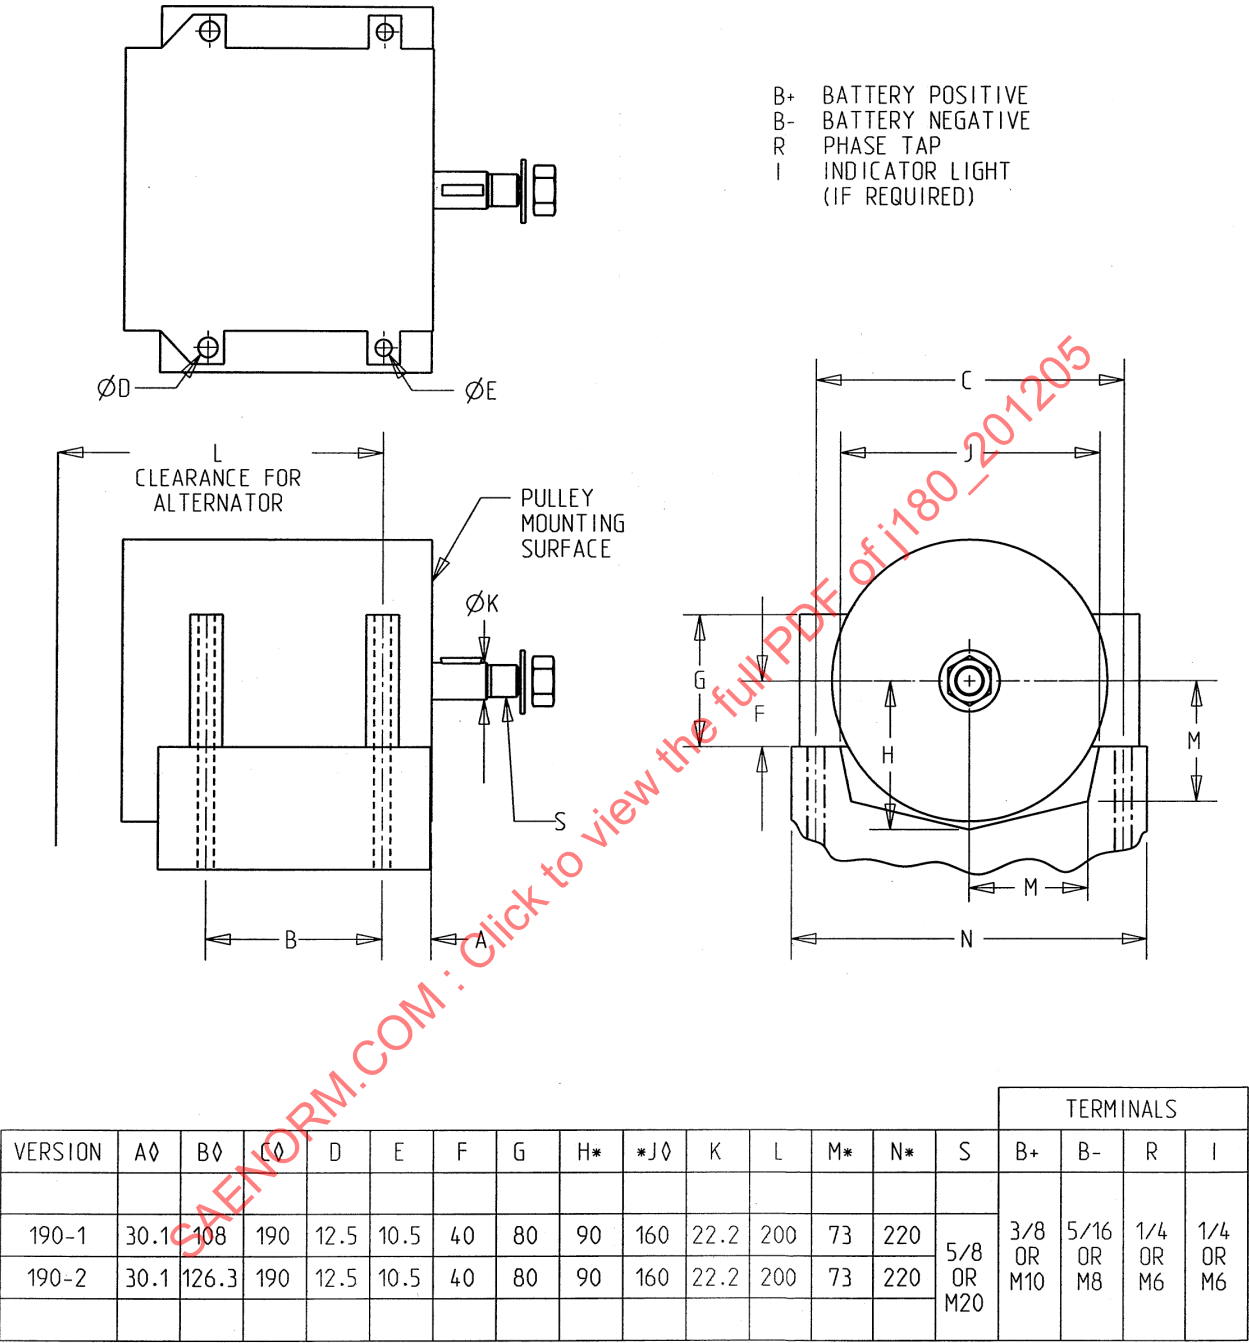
ALTERNATOR DIMENSIONS FOR SPOOL MOUNTING
